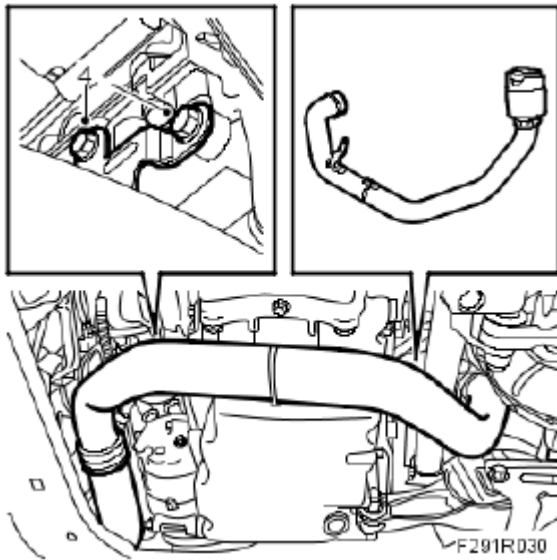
Identifying Charge Air Pipe Retaining Bolts
